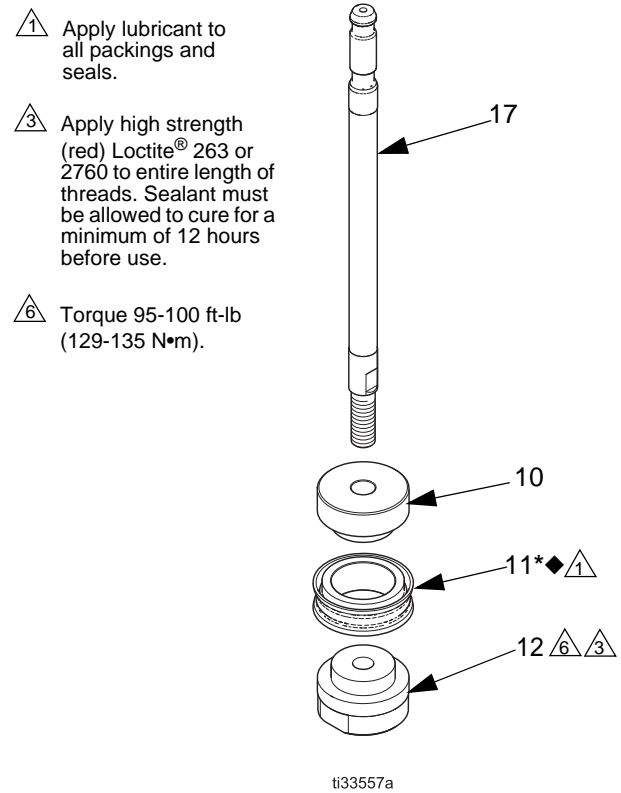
Disassemble or Assemble the Piston (750cc models only)
